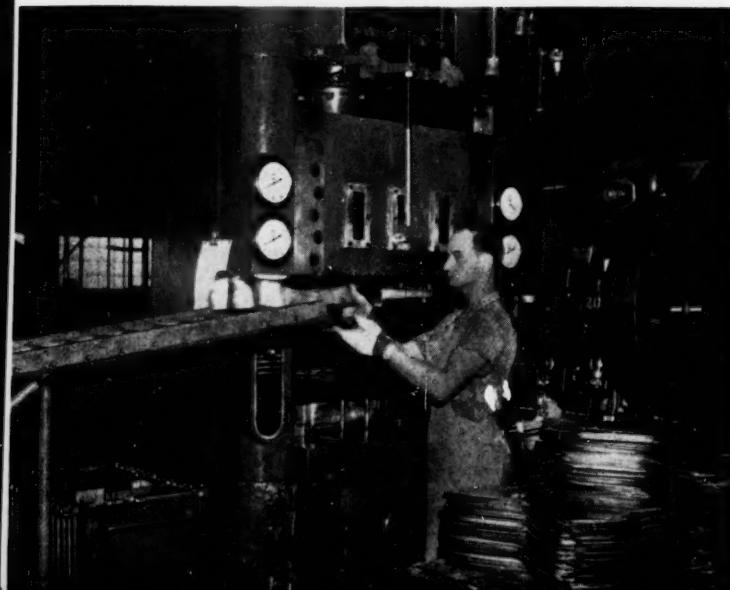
The conveyor system starts with the first draw press operation. Here the press operator is placing a rough formed part on a gravity conveyor which feeds it to the next press operation.
